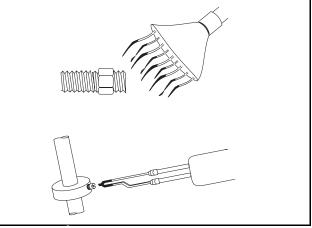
(MSSM0101CE) Removing High Strength Threadlocker
